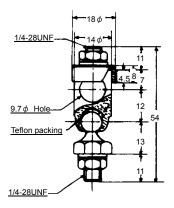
Dimensions (in mm) of ball joint (J-27518-JOINT)
